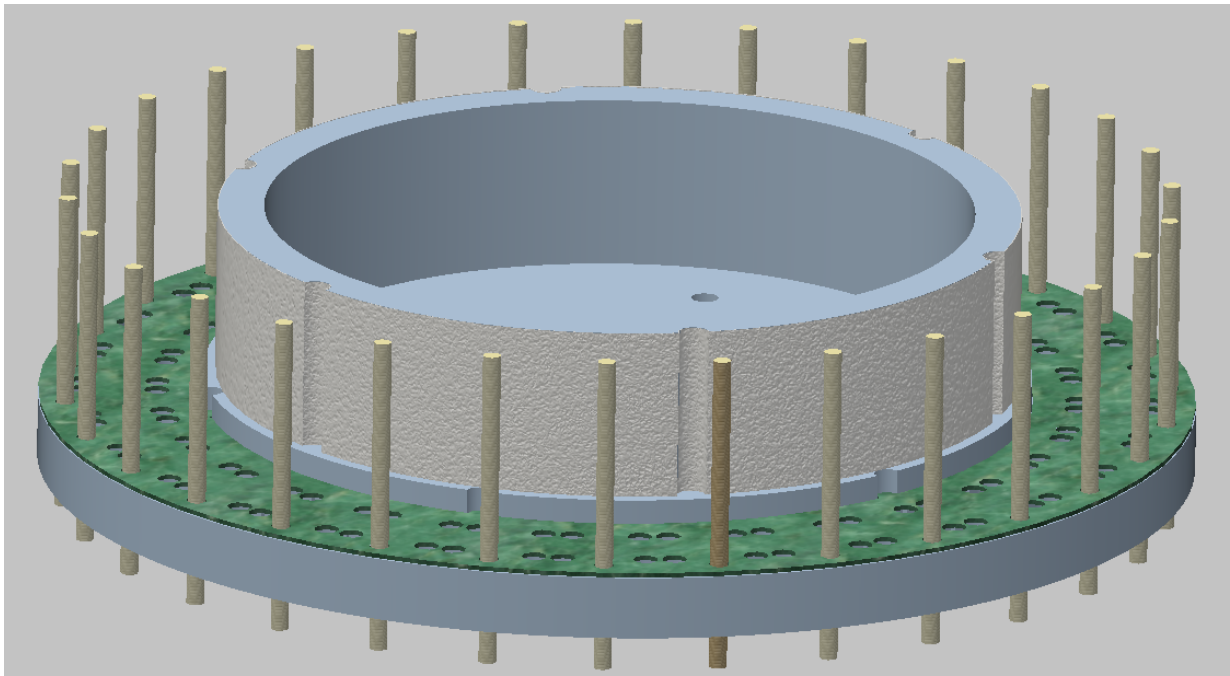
Aluminium stator drum, with FR4 ring, transformer paper and nylon rods. Machine dimensions as described in Appendix B.
